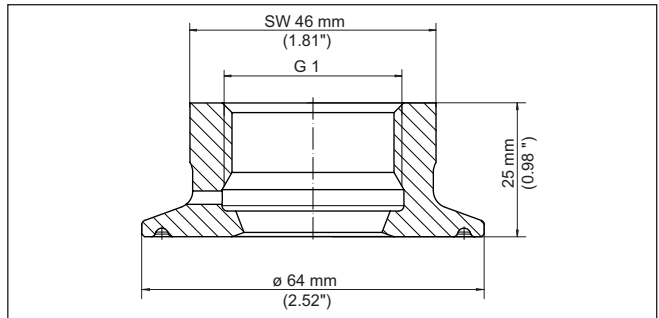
Dimensions hygienic adapter G1 (DIN 3852-X) on Clamp 2" (DIN 32676, ISO 2852) PN 40 - Cone seal
